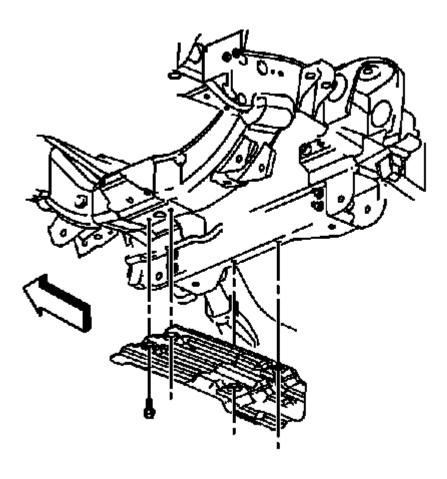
Identifying Engine Shield And Retaining Bolts Courtesy of GENERAL MOTORS CORP.
